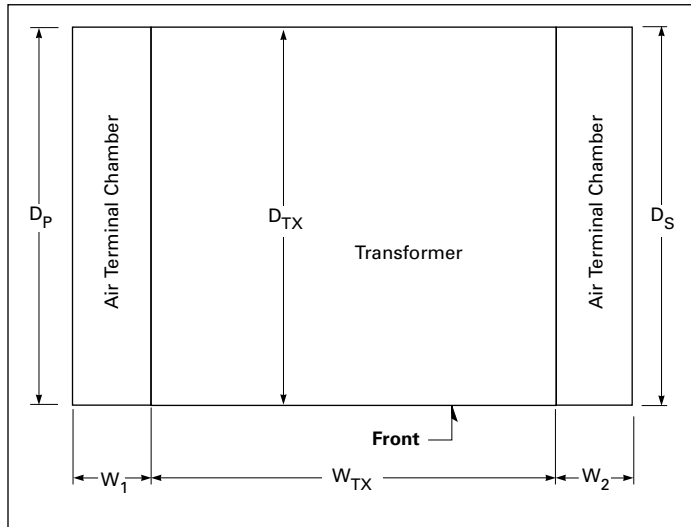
Dry-Type Indoor/Outdoor Using Air Terminal Chambers—Top View
